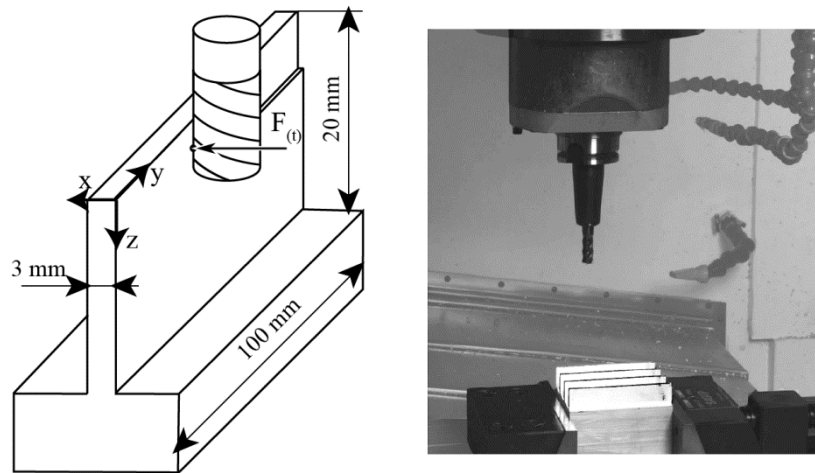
Thin wall milling. Left: workpiece. Right: experimental set up
